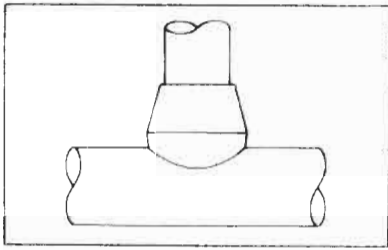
Branch connections for welding openings into steel pipe. See Figure 2-4C for alternate welding fittings. By permission, Bonney Forge Corp., Allentown, PA.
